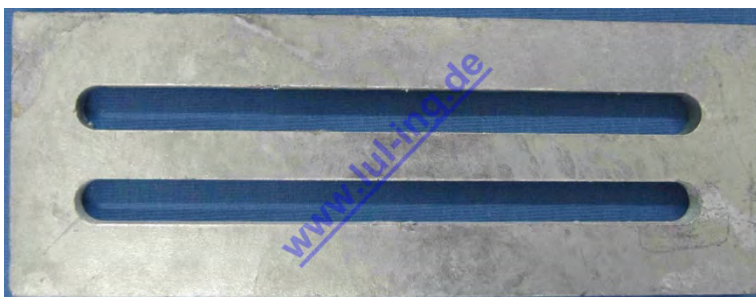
1.20.92030 TSG connection plate for door panel carrier
